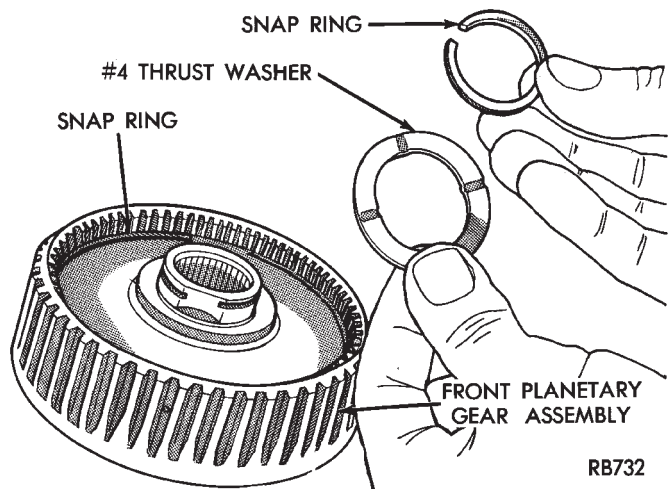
Front Planetary Gear Snap Ring and No. 4 Thrust Washer (Always Install a New Snap Ring)
